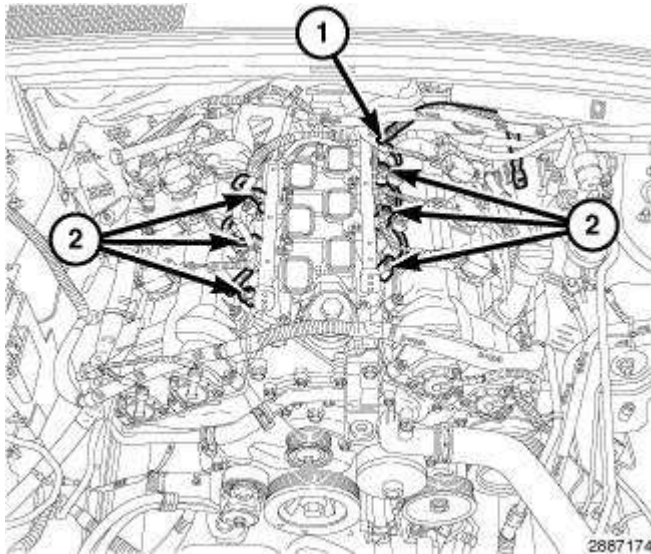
Fuel Supply Hose & Fuel Injector Electrical Connectors
